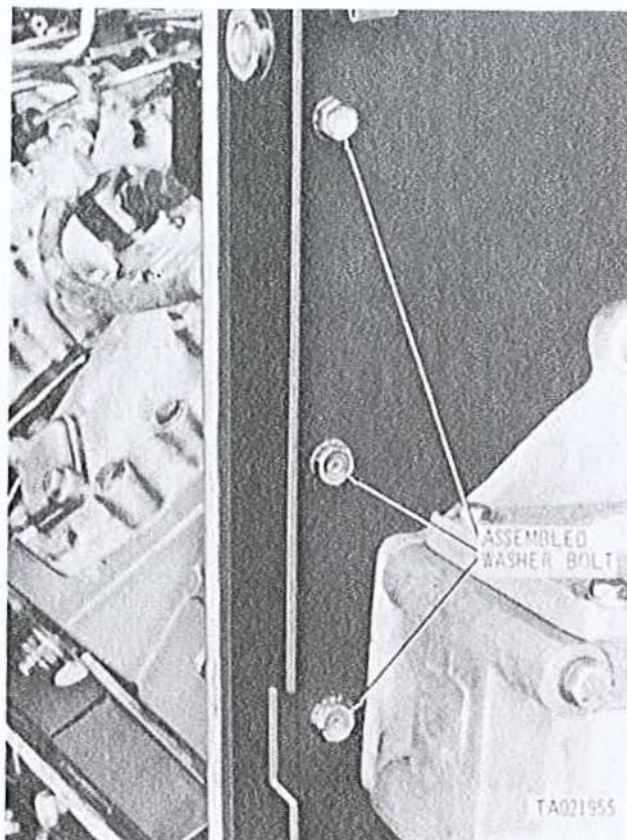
Disconnecting or connecting left front oil cooler support frame.
